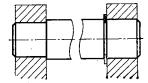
Stepped pin fixed against axial displacement by radially set retaining ring
